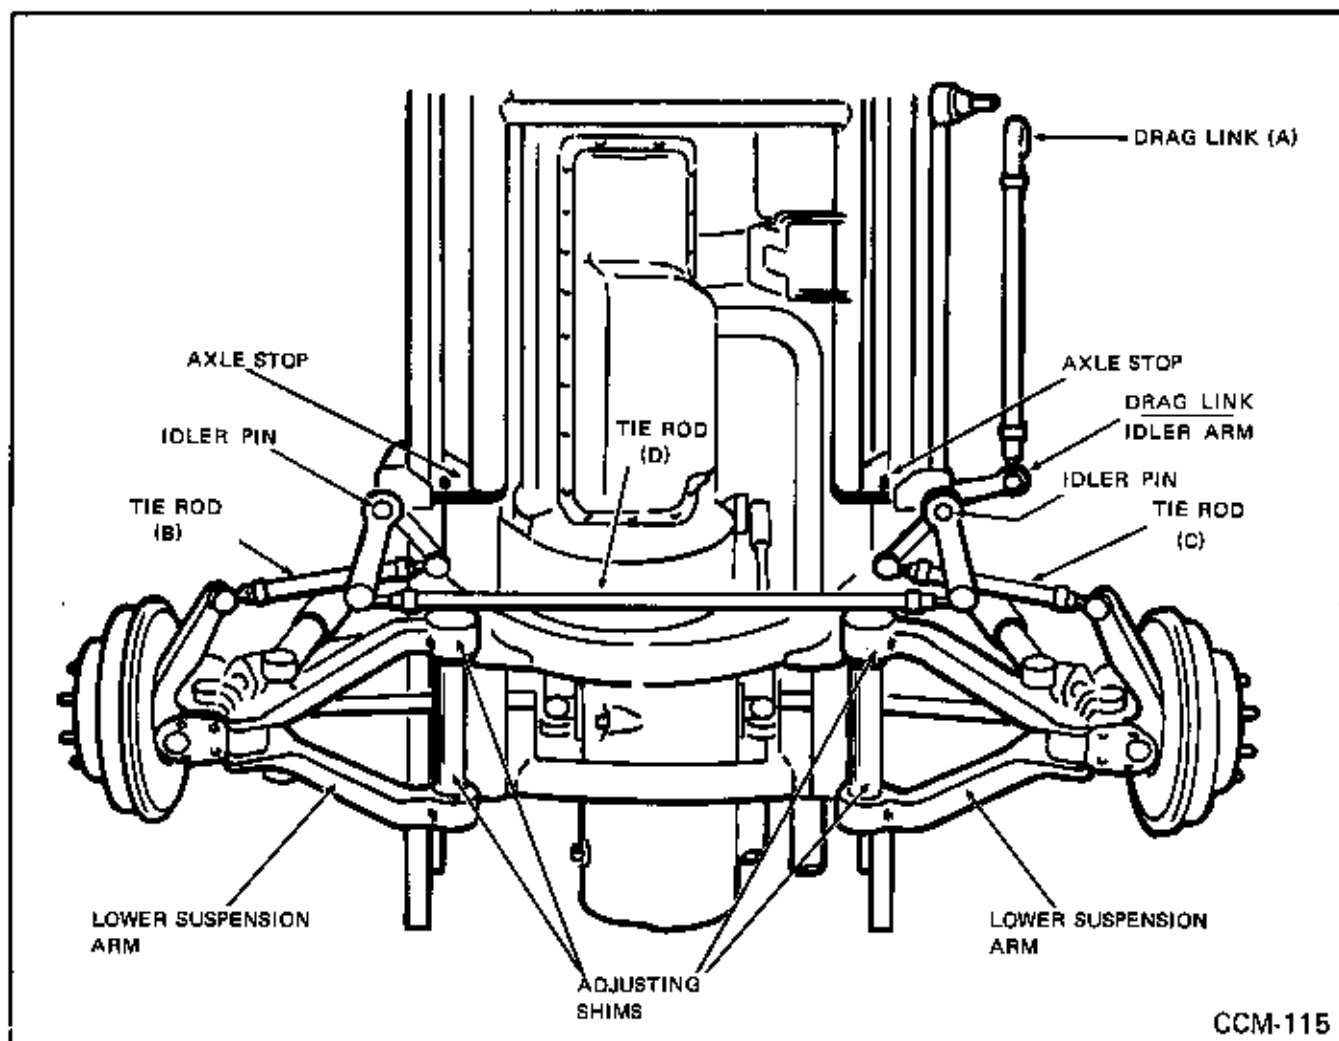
Wheel Alignment and Steer Linkage Adjustments
